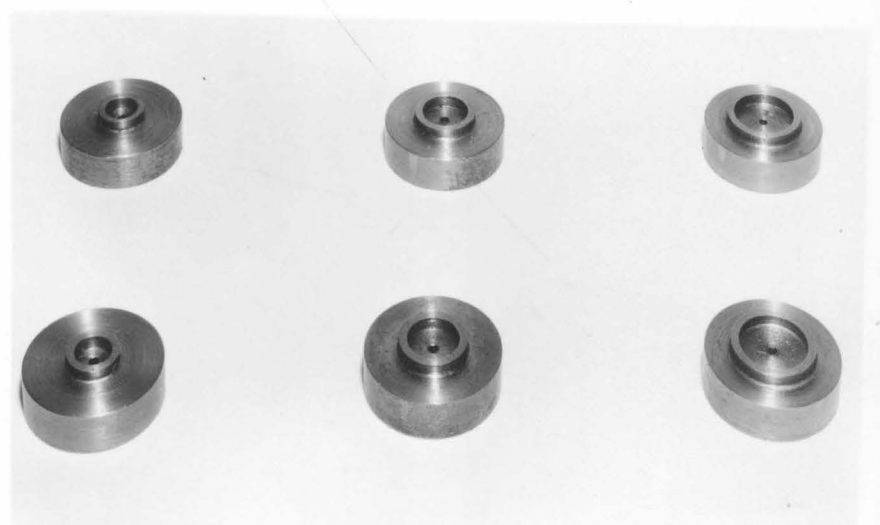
RING ELECTRODE ASSEMBLIES USED ON TESTING MACHINE NO. 1.
